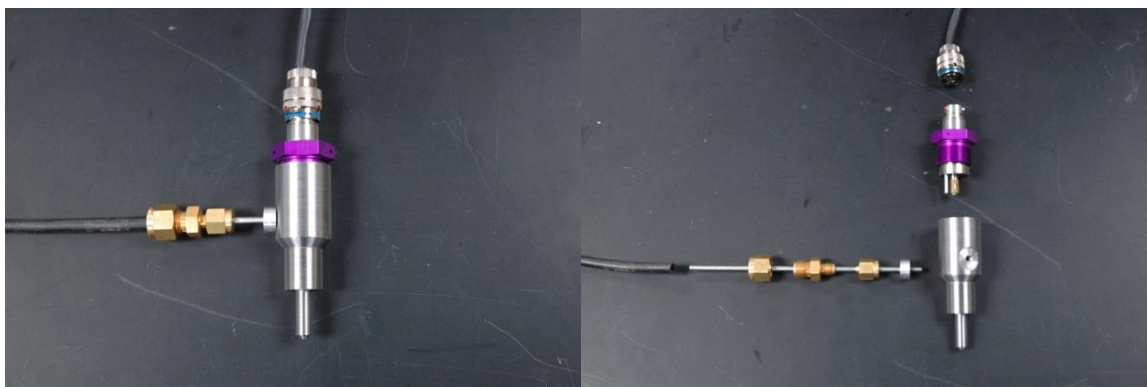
Residual Gas Injector prototype a. assembled and b. exploded
